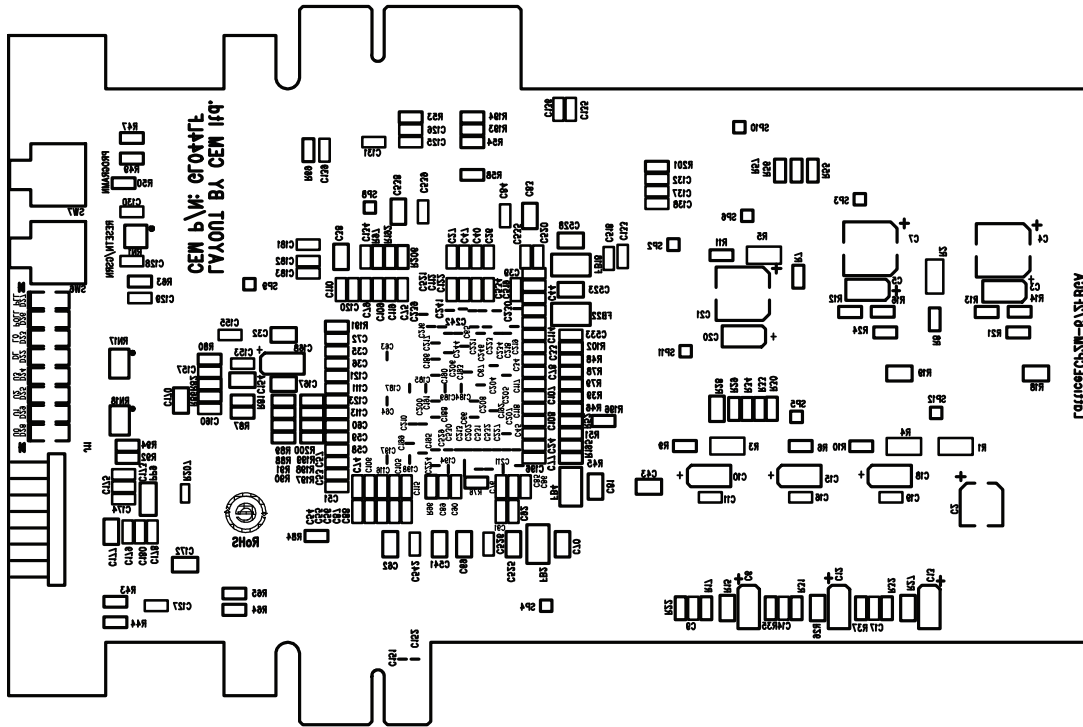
PCI Express Solutions Board Outline Drawing, Bottom Side
